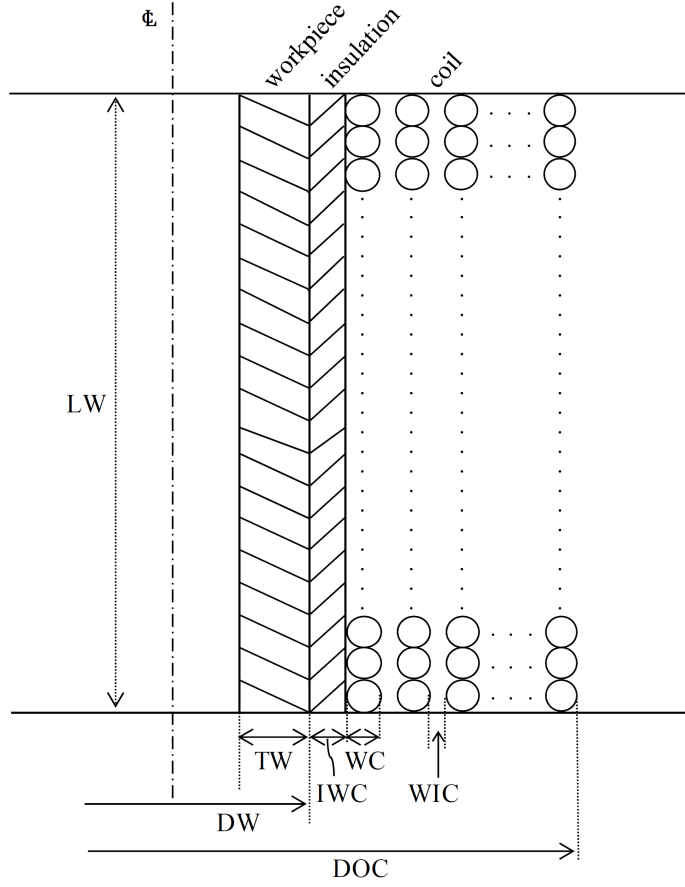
Cross-section of a multi-layer coil induction heater with a tube workpiece.
